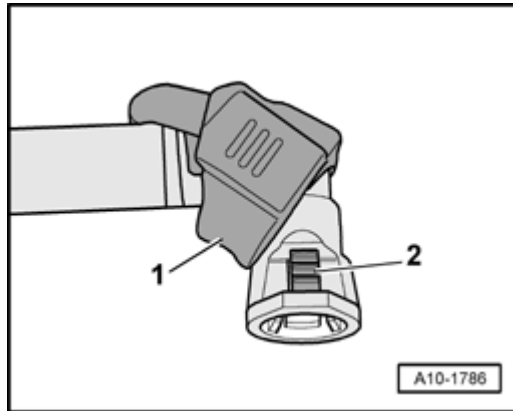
Identifying Vacuum Connections Back Rubber Cap & Retaining Tab
